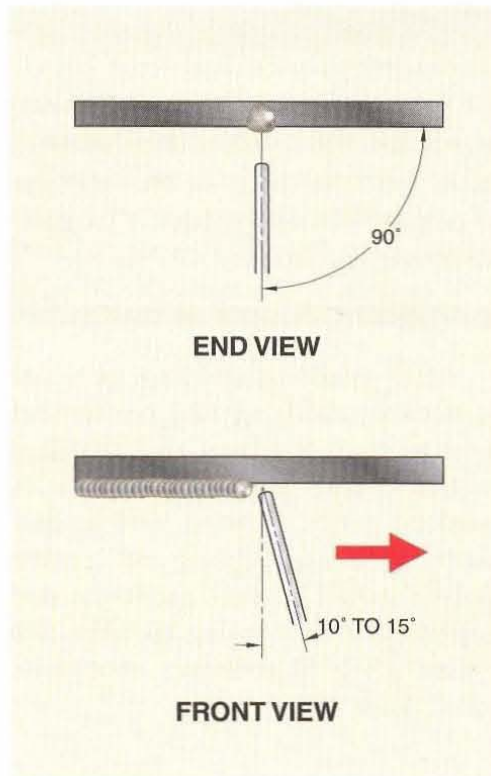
For overhead welding, the electrode should be held at a work angle of 90° and a travel angle of 10° to 15° .
